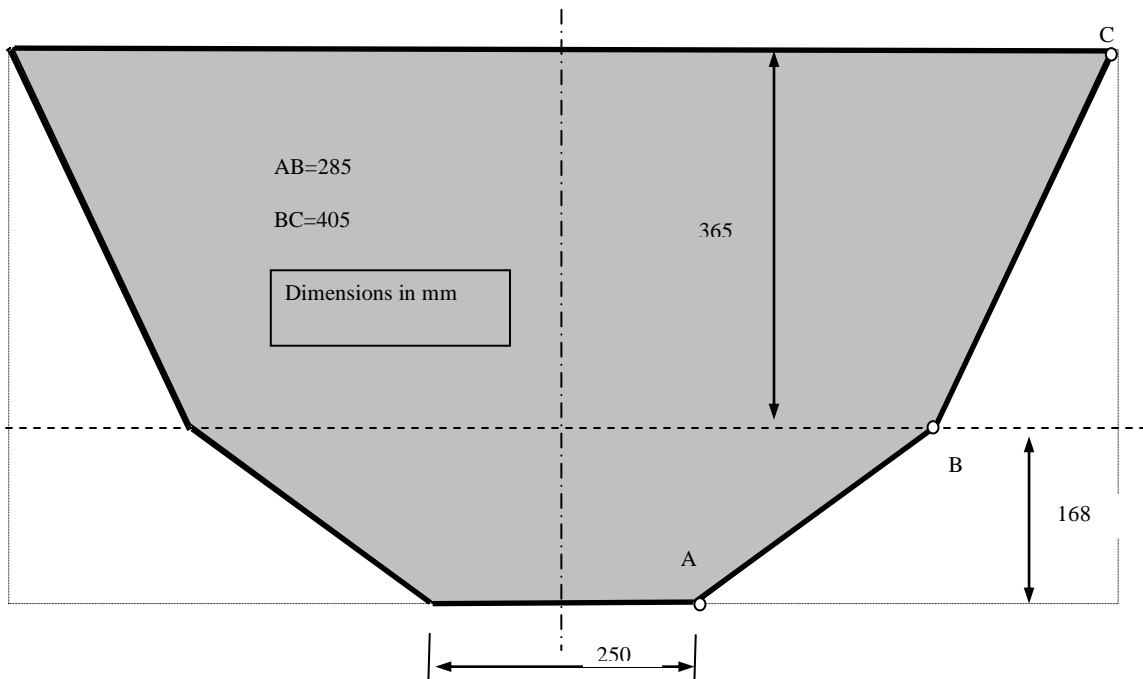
Schema of auxiliary pieces in cardboard ( or wood plate or metallic thin plate) to better control the folding process
